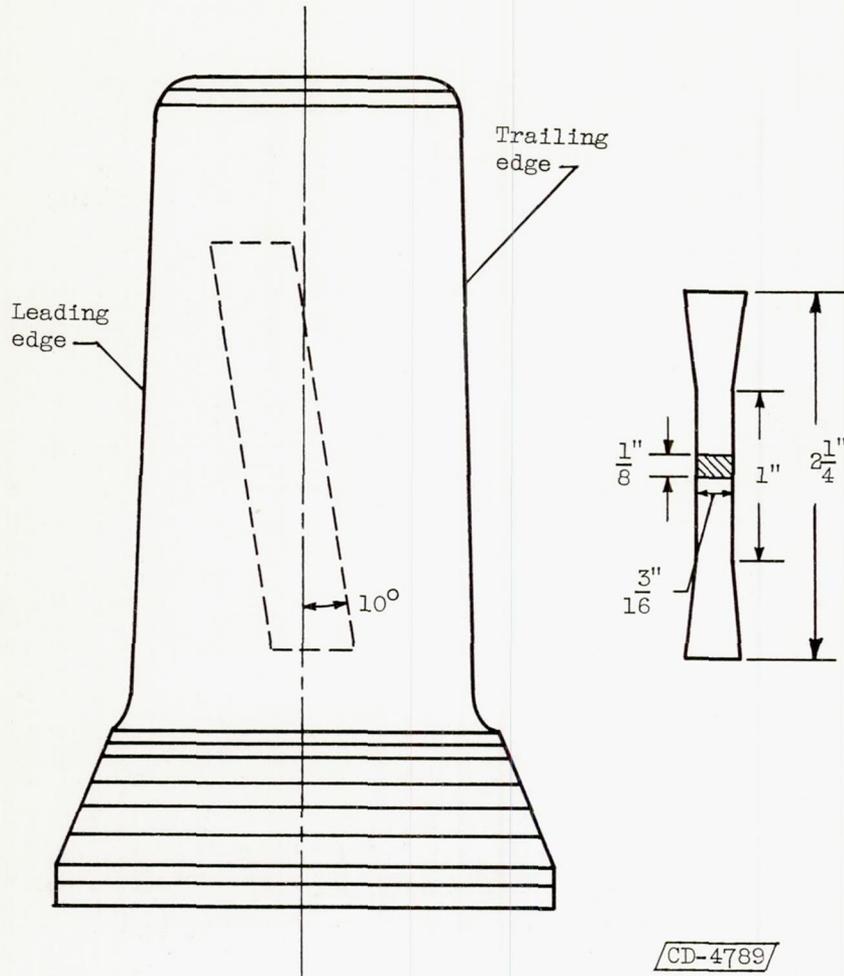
Bucket stress-rupture specimen and zone from which it was machined.
